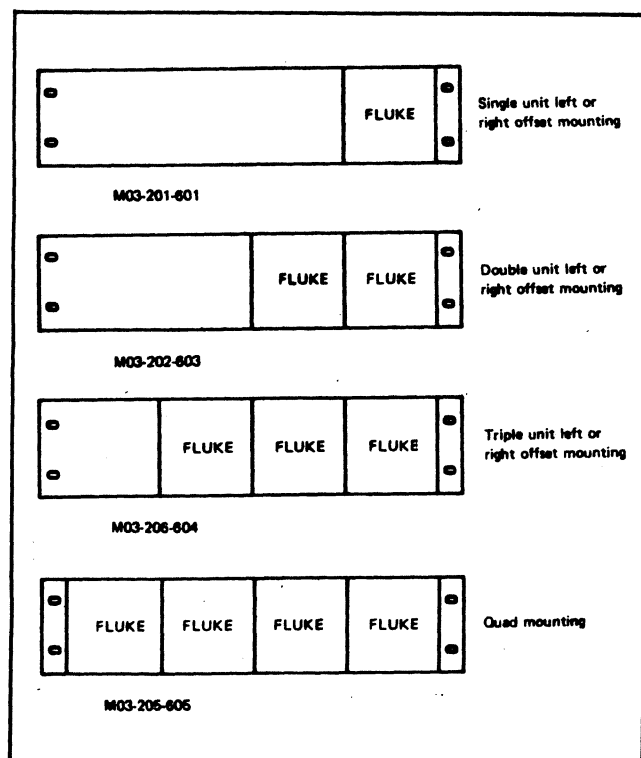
RACK MOUNTING CONFIGURATIONS.
